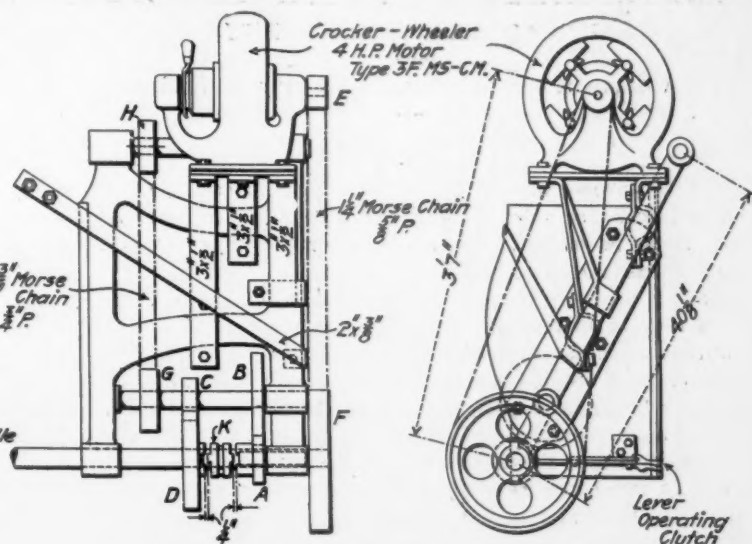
DETAILS OF THE APPLICATION OF THE MOTOR DRIVE, SHOWING METHOD OF MOUNTING THE MOTOR UPON THE BRACKET BY MEANS OF THE WROUGHT-IRON PLATE AND STRAPS.
